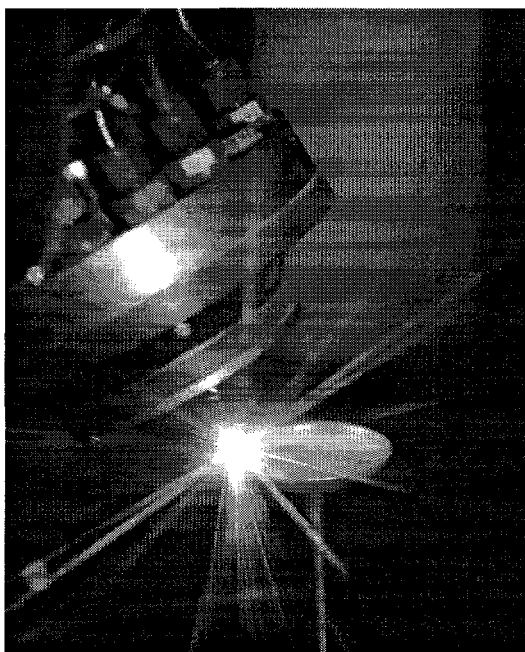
Five axis deposition of a 316 stainless steel cup and support tube showing the laser head tilted perpendicular to the layer being added.
